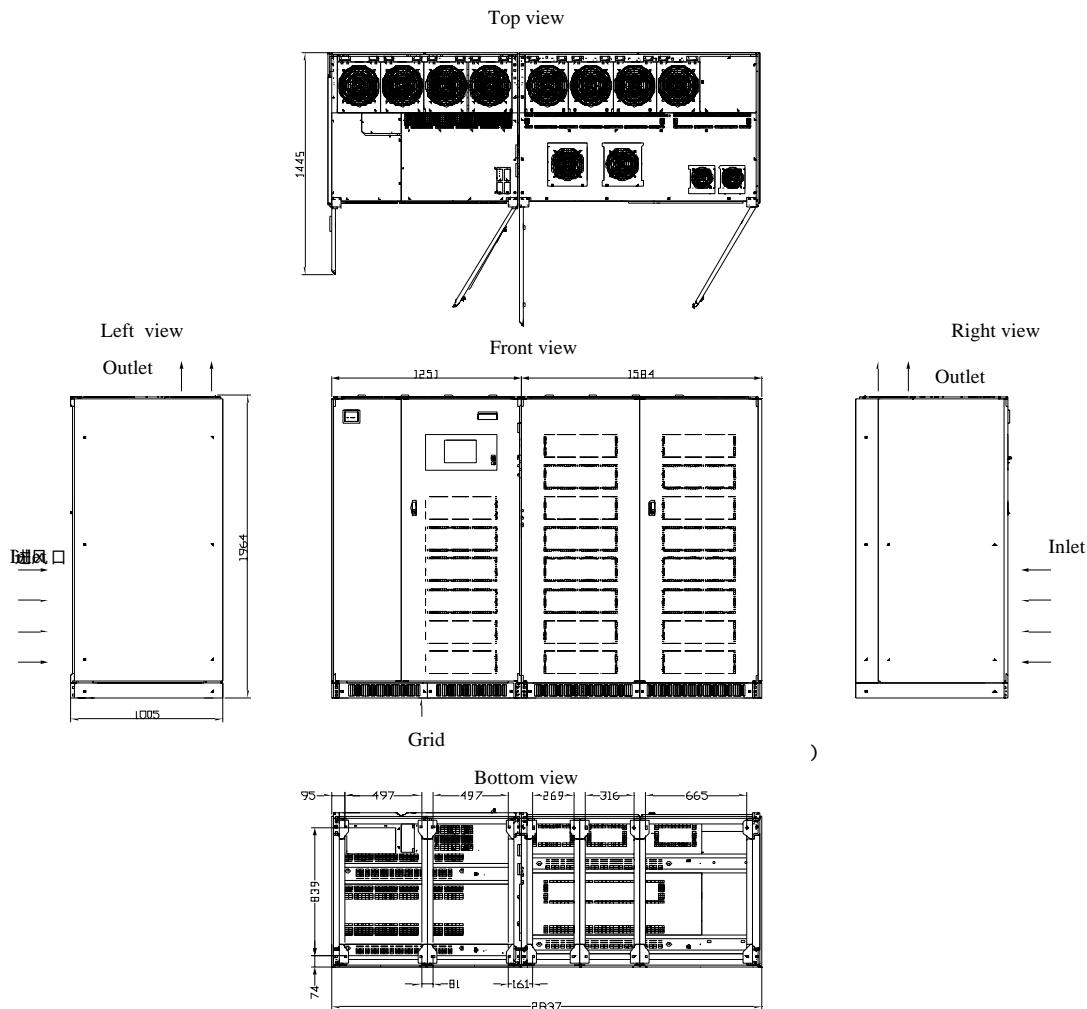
3 Top, front, side and bottom views of 500kVA UPS (unit in mm)
